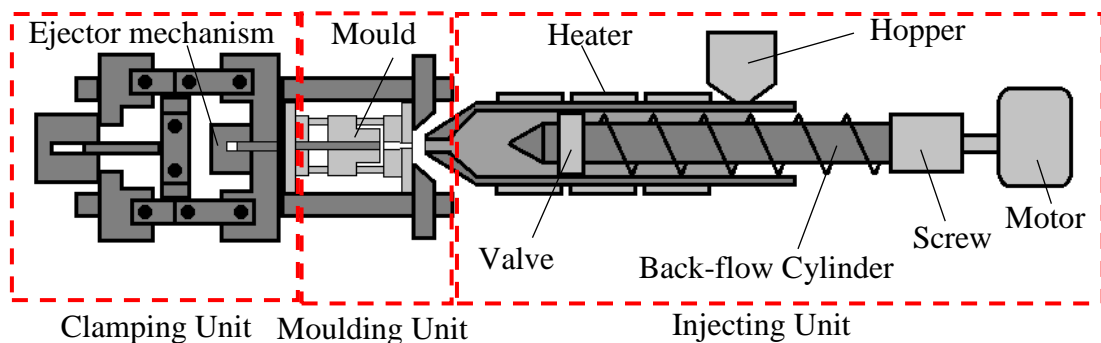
Injection moulding machine (Dominic et.al. 2000)
